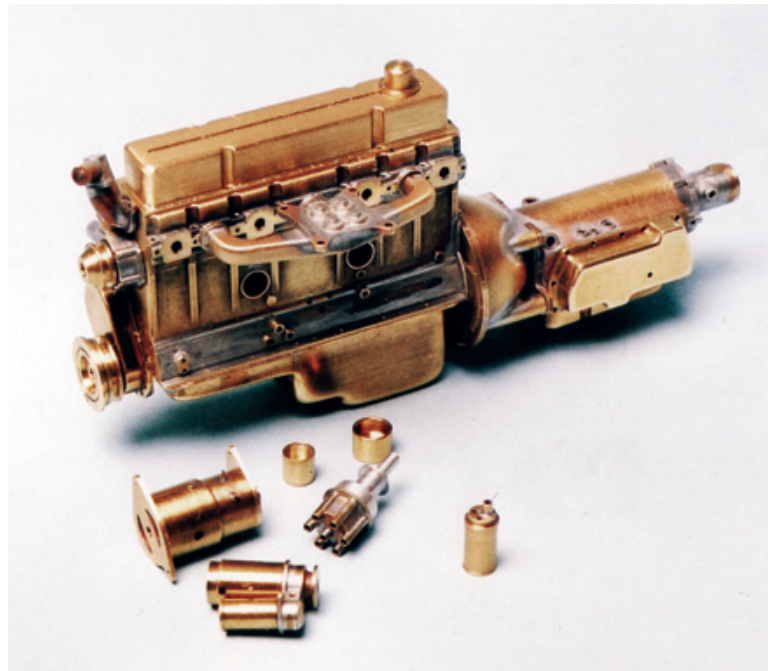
The passenger side of the engine shows the meticulous detail, as well as the Hydraulic transmission fully-assembled and in place. The side cover is machined, will be polished and chrome plated (along with the valve cover and oil pan), and will be attached to the side of the block with look-alike hex “bolts” (but without threads). Note that the oval front cover and lower pulley are in place here.
